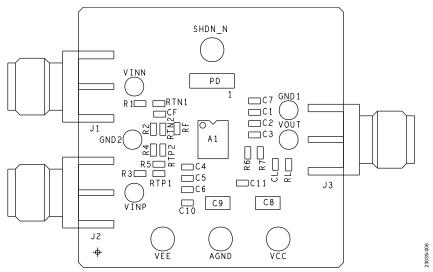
EVAL-LTC6226S8/EVAL-LTC6228IS8 Assembly Drawing, Primary Side
